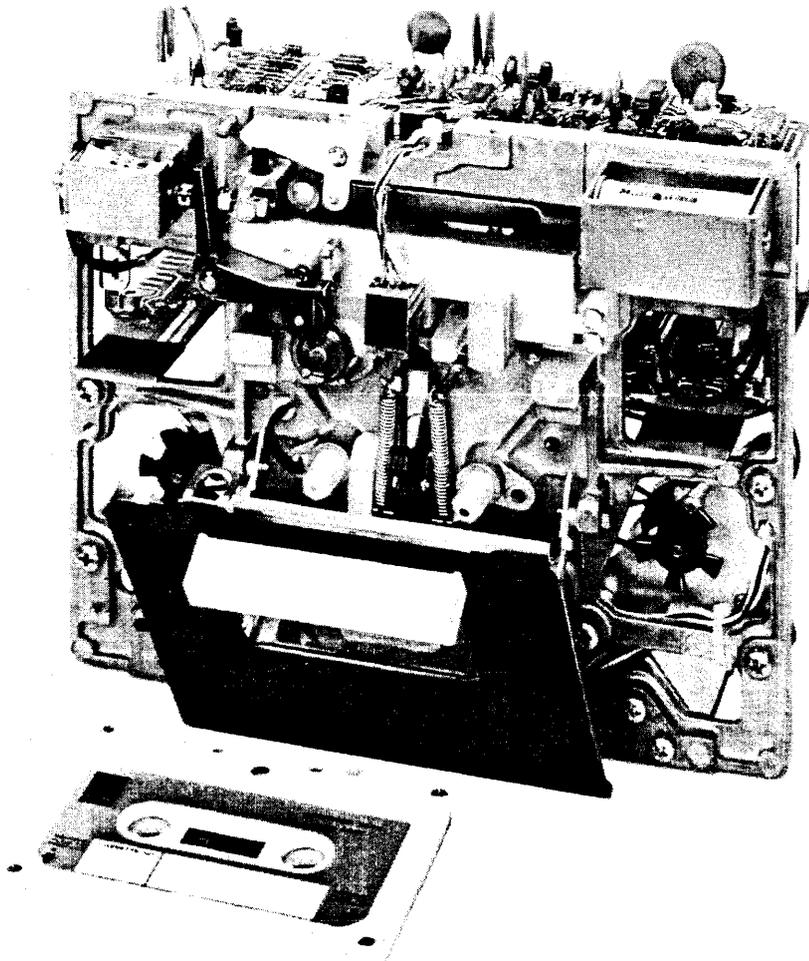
TAPE TRANSPORT ASSEMBLY, FRONT VIEW
